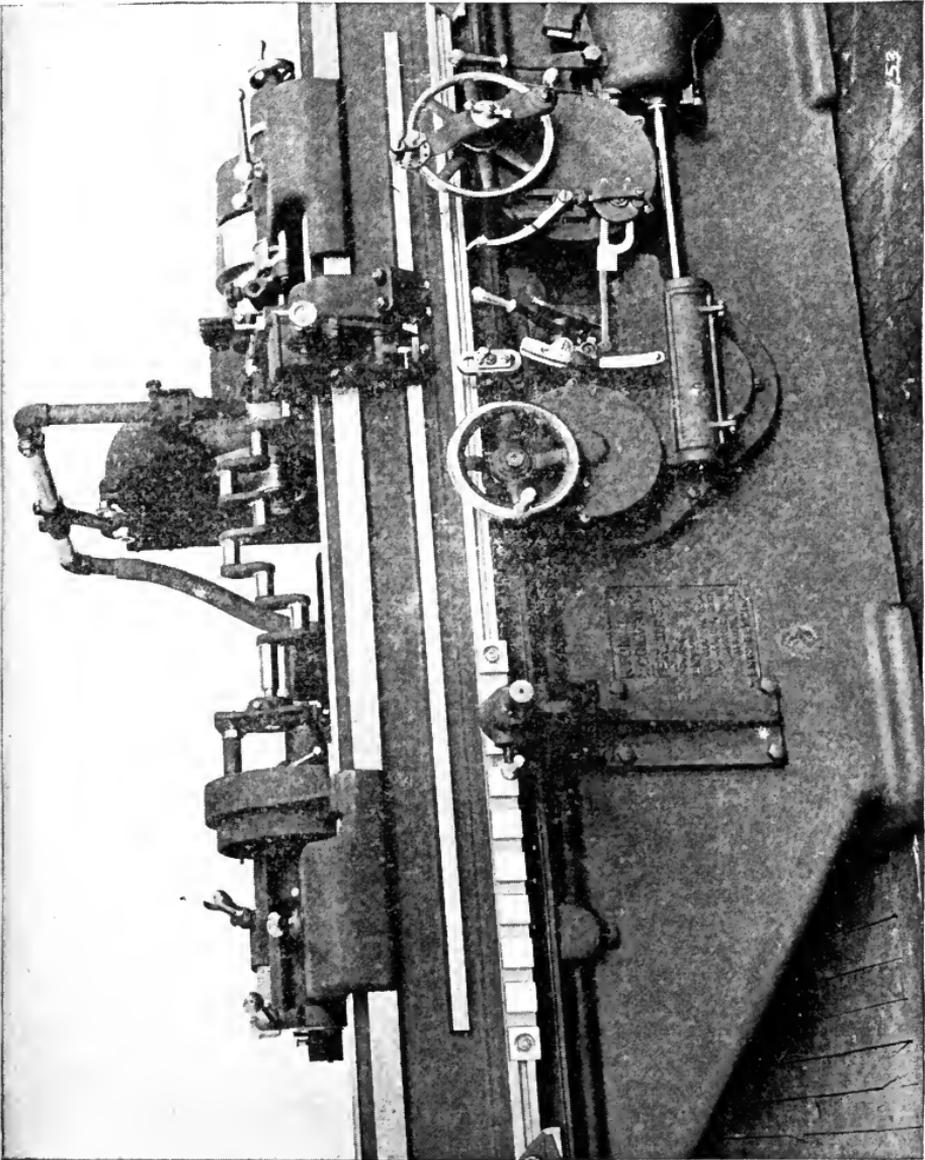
Norton Grinding Machine Grinding Crank Shaft
